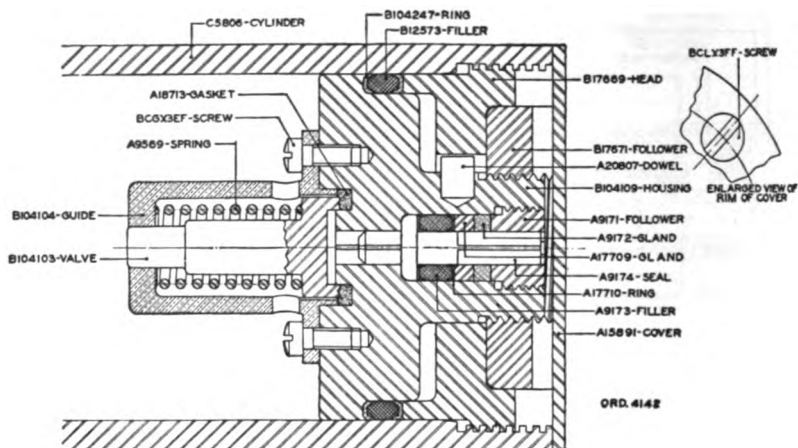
Recuperator cylinder rear head assembled, sectioned view.
